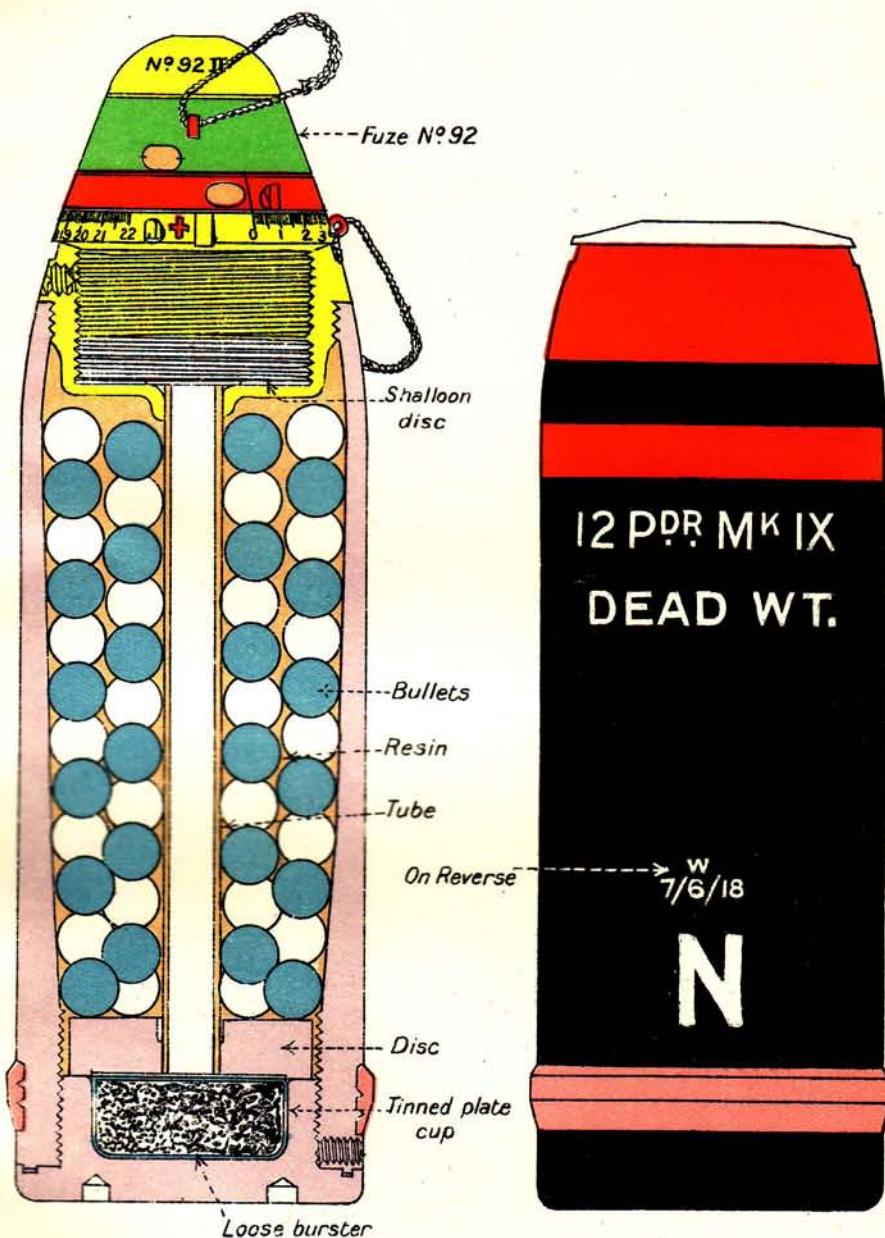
shows the shrapnel shell for the 12-pdr. It has not a detachable head, and the fuze hole bush is only secured by a few threads. The central tube is filled by compressed pellets of powder, and the bursting charge also consists of pressed pellets. To allow of these being put in, the base is detachable, being screwed on and held with a set screw.
